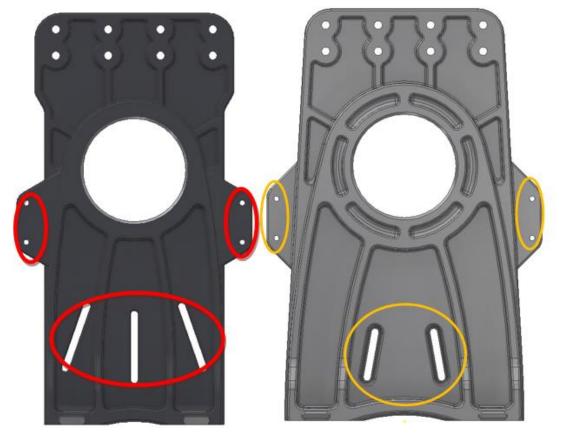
Outboard Stand Mounting Locations GT11 (left) and GT31 (right)
